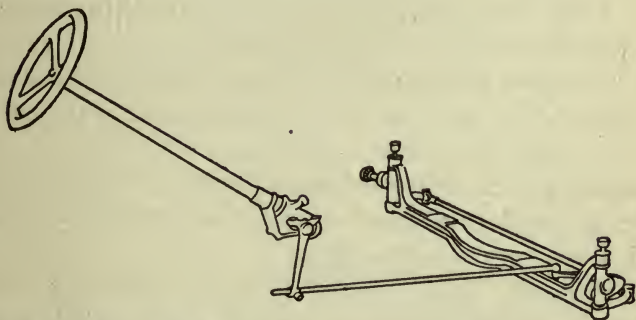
THE WORM STEERING GEAR COUPLED TO THE KNUCKLE ASSEMBLY
